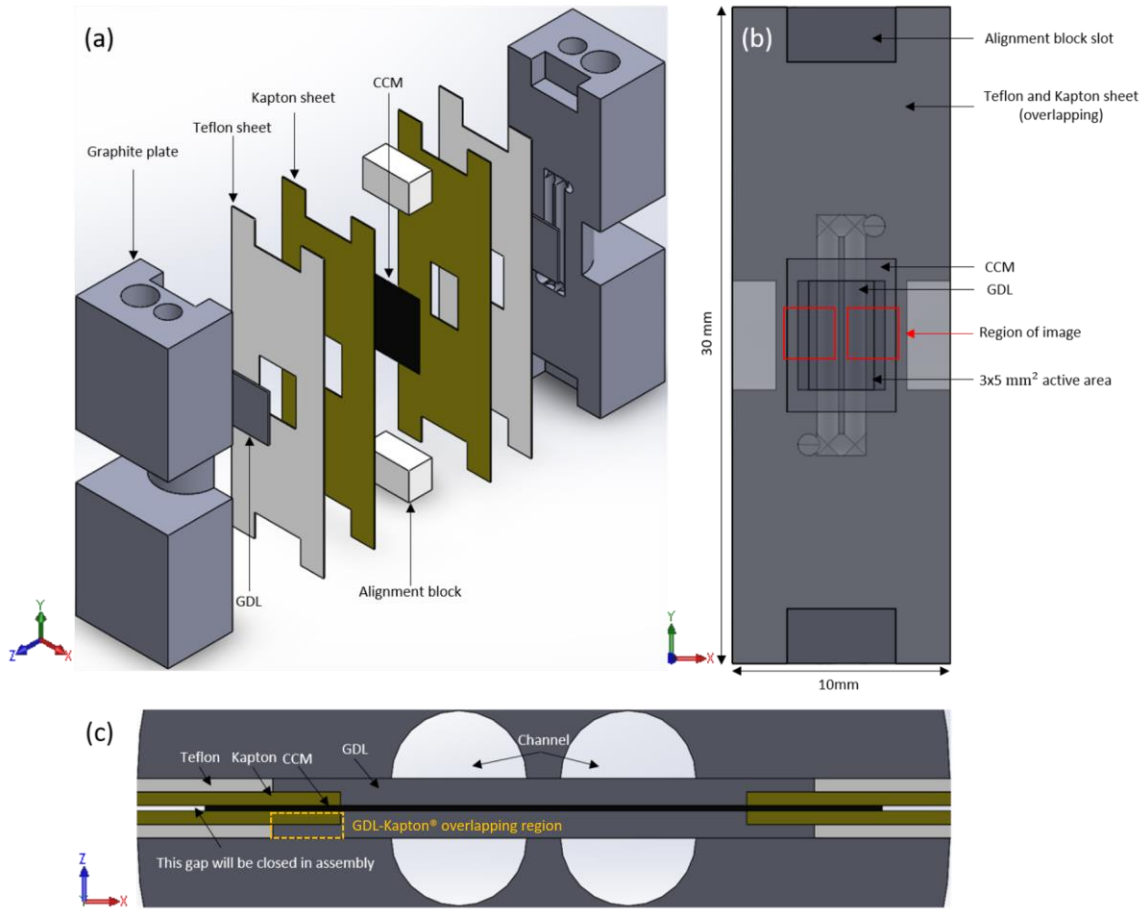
MEA edge design 1: (a) 3D exploded view; (b) planar view; and (c) cross-sectional view.
